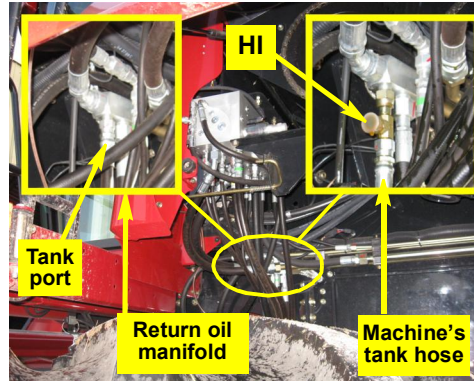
with insets: Run-tee at tank port, machine's tank hose reconnected
